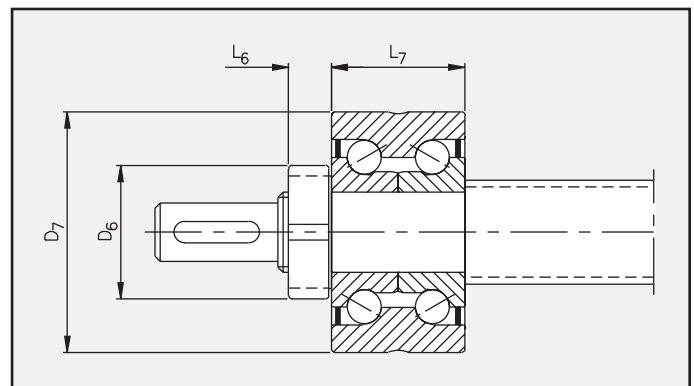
• Standard Screw End - Form D With ZKLN & ZM
